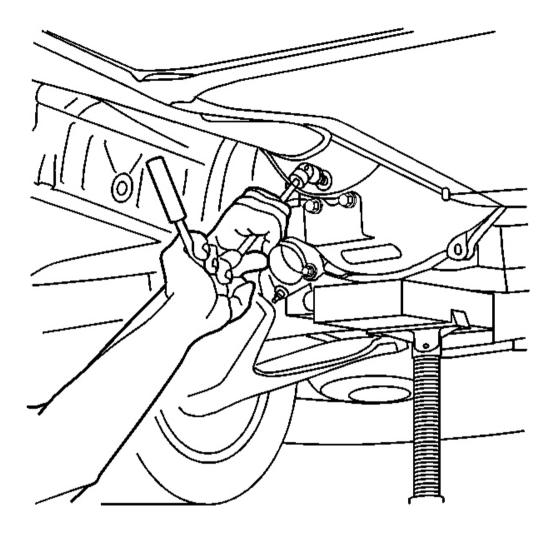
Removing/Installing The Five Driveline Support Assembly To Engine Flywheel Housing Bolts
